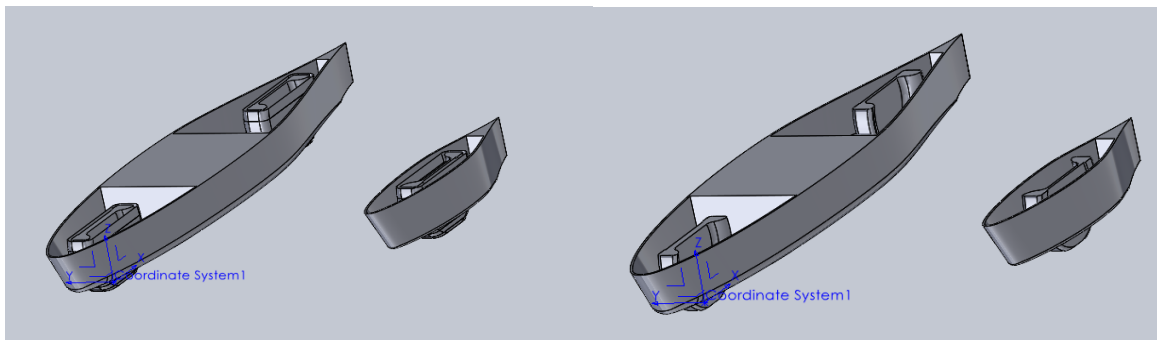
A cross-sectional view of the Solidworks 3D model of the fairing geometry for the modified ‘DUSC 2023’ design with (left) and without (right) wheel housings.
